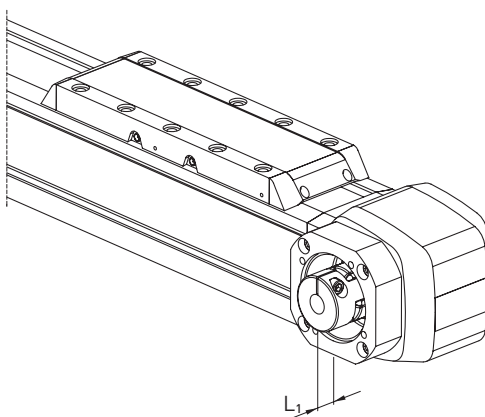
Adjusting the clamping hub distance in the direction of the motor on linear axis HM-B
